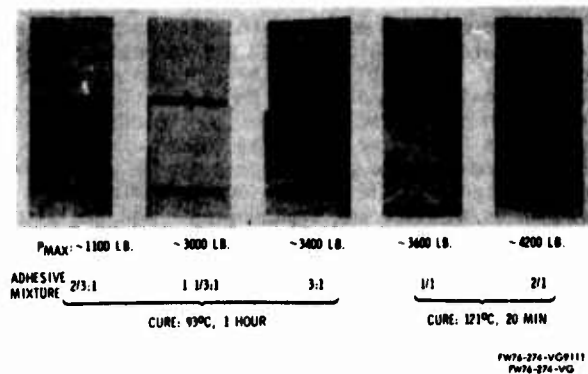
Fracture Surfaces of Single Overlap Specimens
